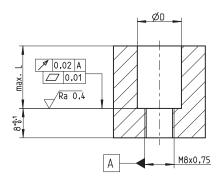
Flush mounted Sensor. Bore ø according to mounting tool. See picture 4 and picture 5
